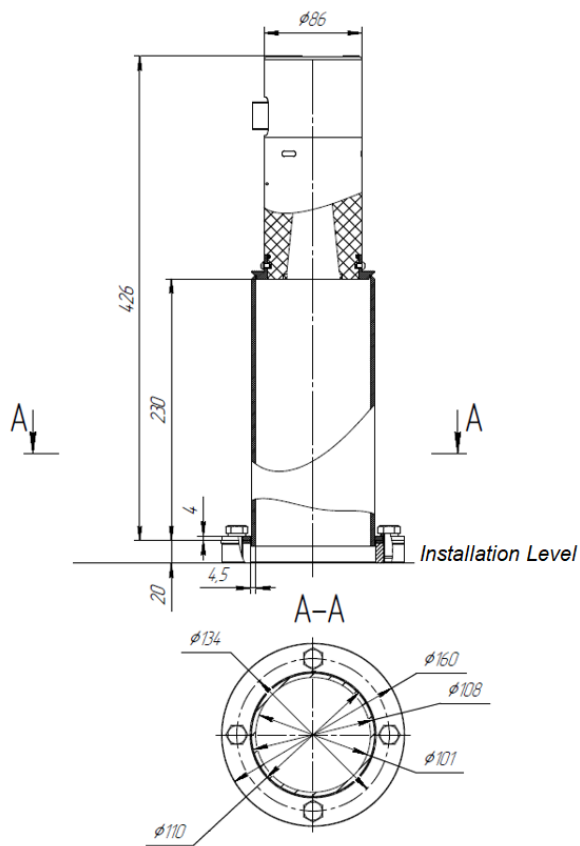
Overall dimensions of the U-150 Level Gauge with the enclosed stand
